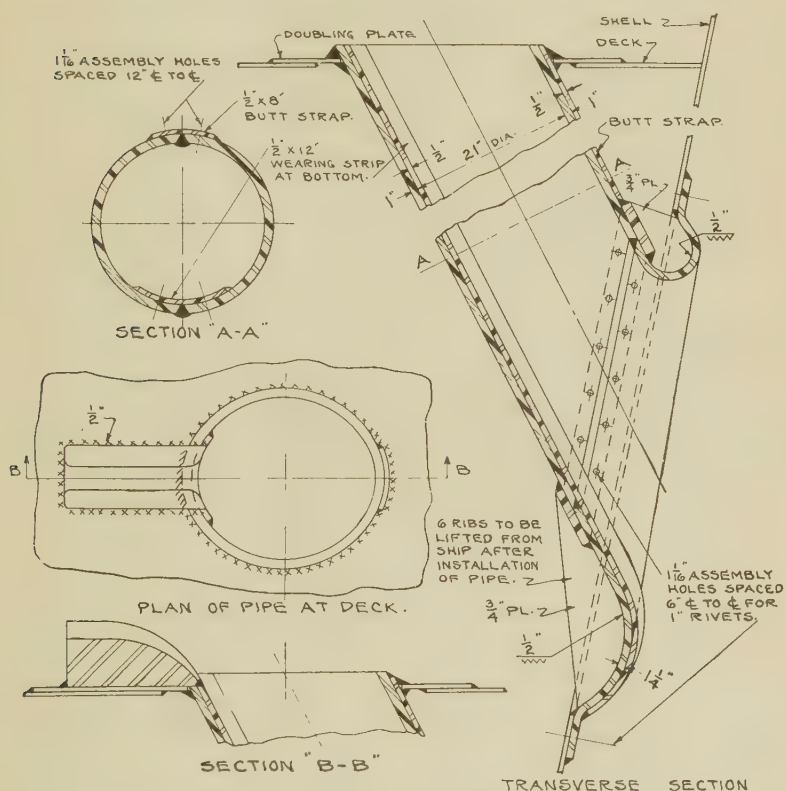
Welded hawse pipe for 13,220-ton dead-weight freighter.
